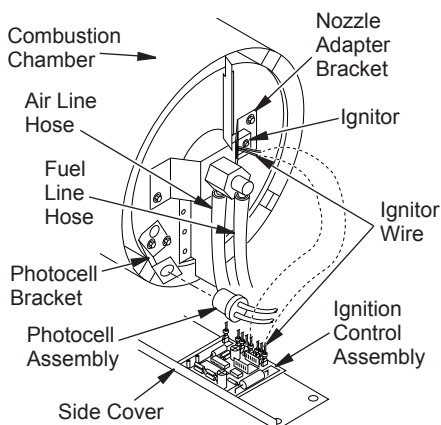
Disconnecting Ignitor Wires from Ignition Control Assembly
